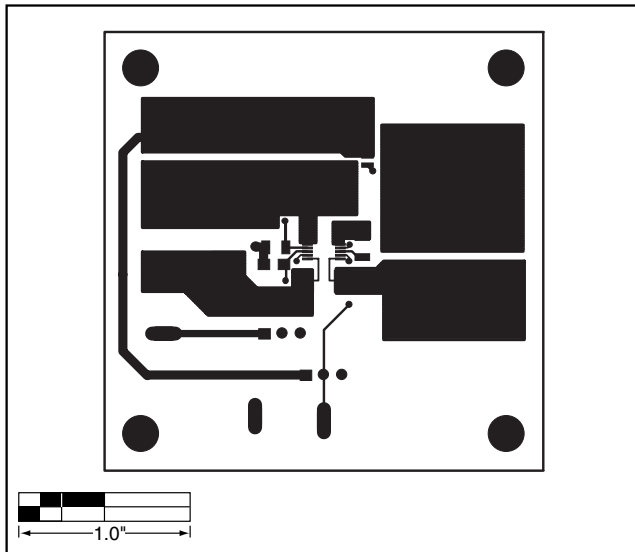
MAX1744 EV Kit PC Board Layout—Component Side
